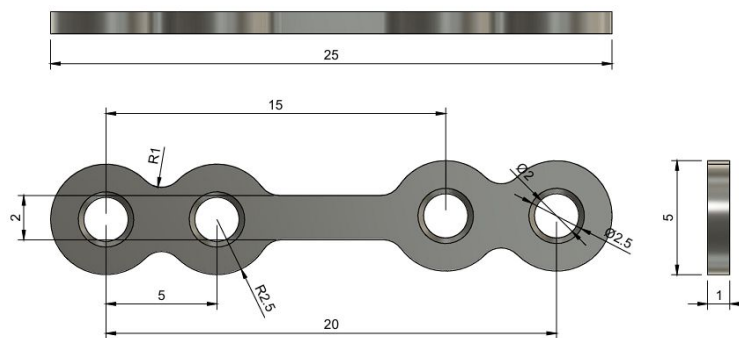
Different views of a straight shaped fixture plate (all dimensions in mm)
